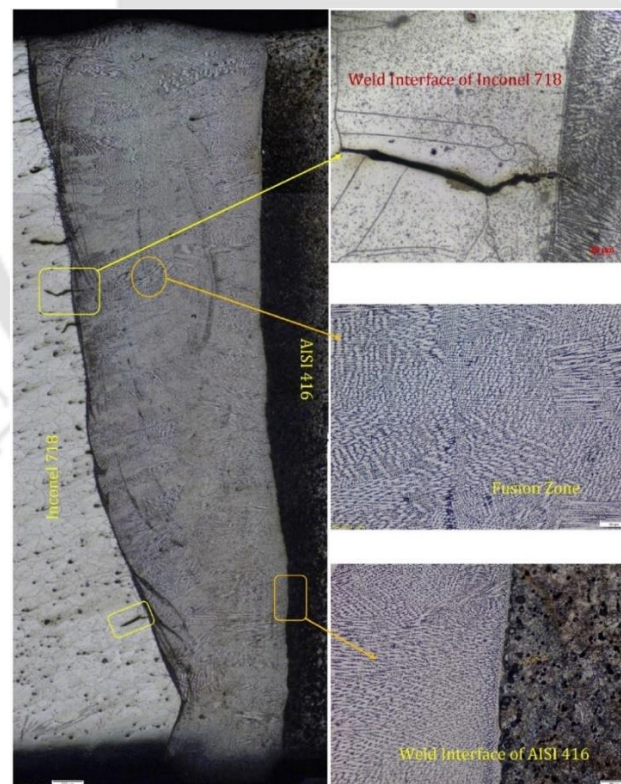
Micrograph of Inconel 718 and AISI 316L laser weld bead showing formation of liquation cracks (Ramkumar et al., 2019)
